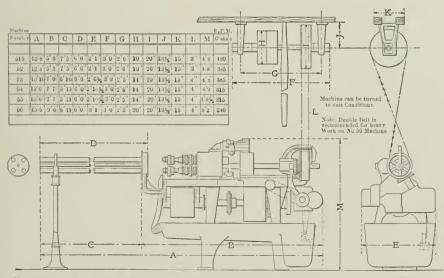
Overhead Works and Overall Dimensions Acme Automatic Screw Machine
